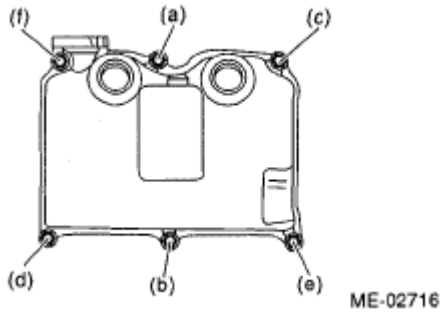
Identifying Rocker Cover Bolts Tightening Sequence - LH Side
